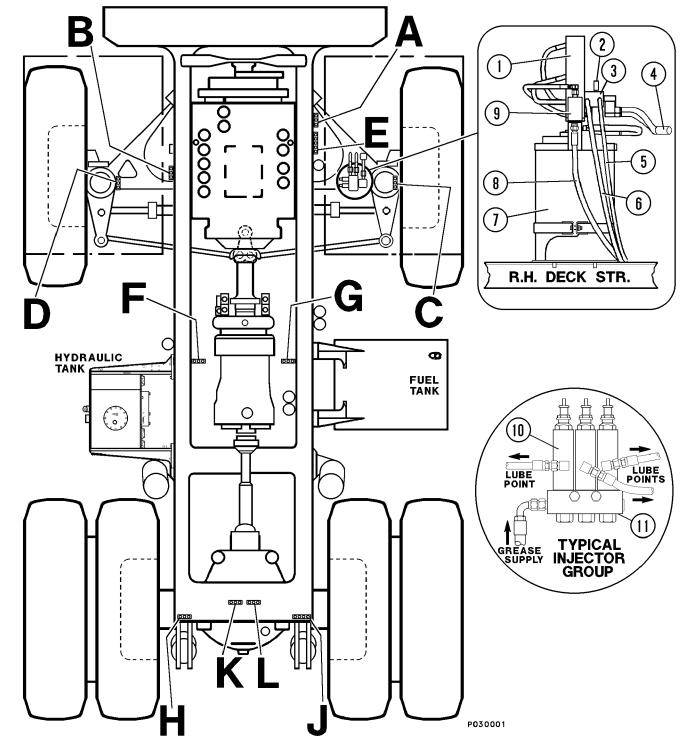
530M AUTO LUBE ARRANGEMENT
